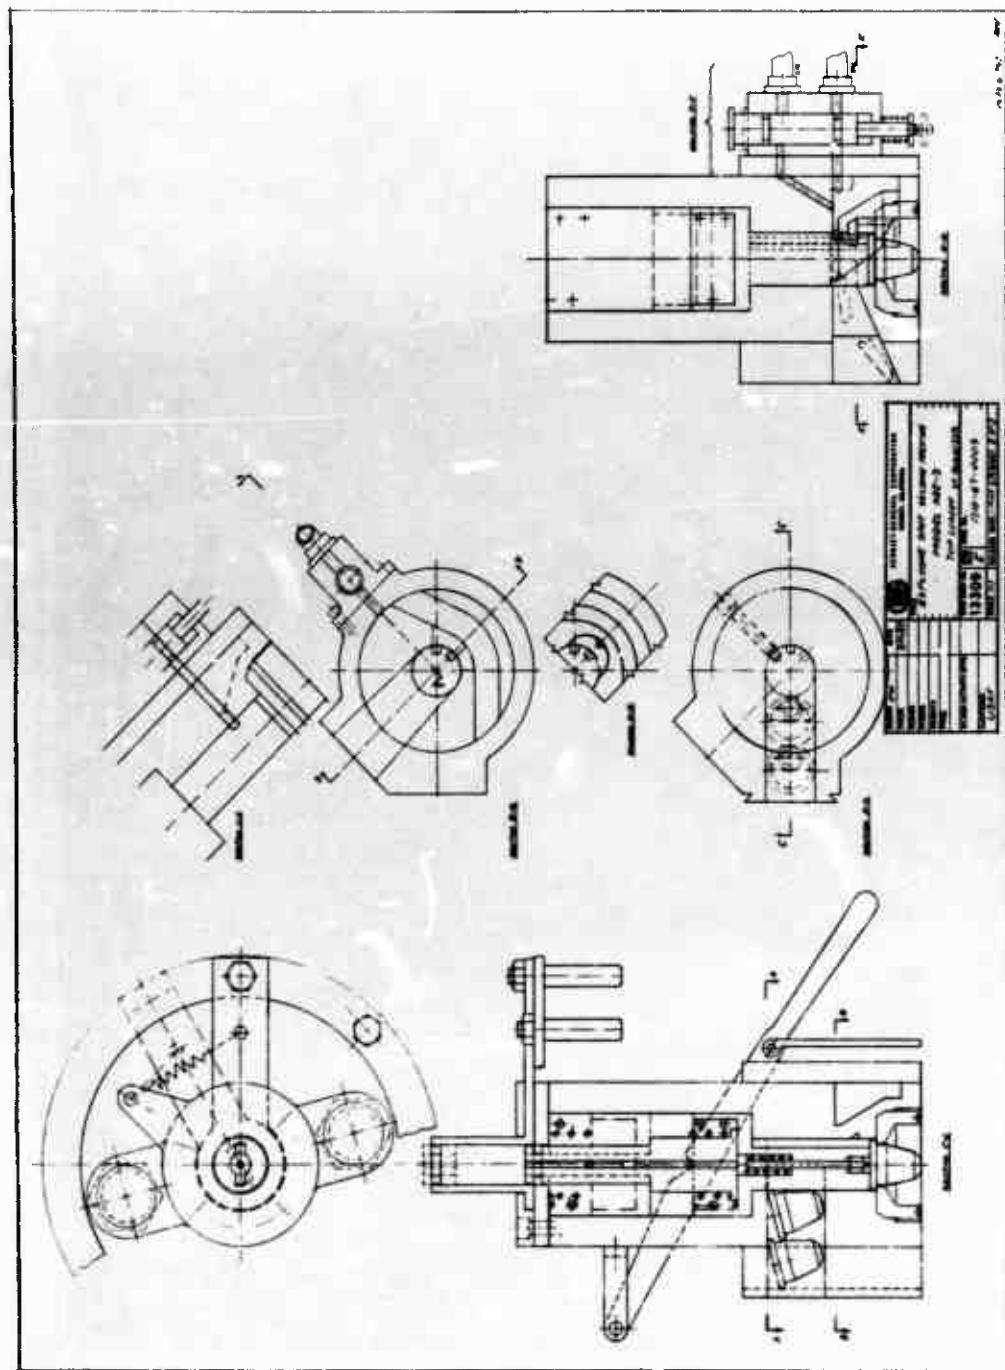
Model AGC-3 Explosive Spot Welding Machine (Sheet 1 of 2).
